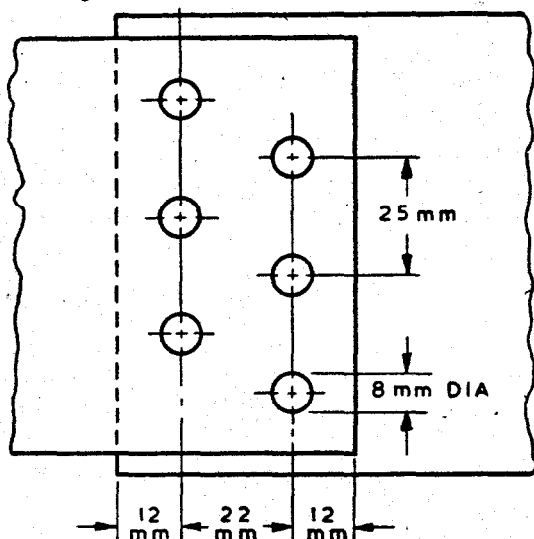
TYPICAL ARRANGEMENT OF JOINT
